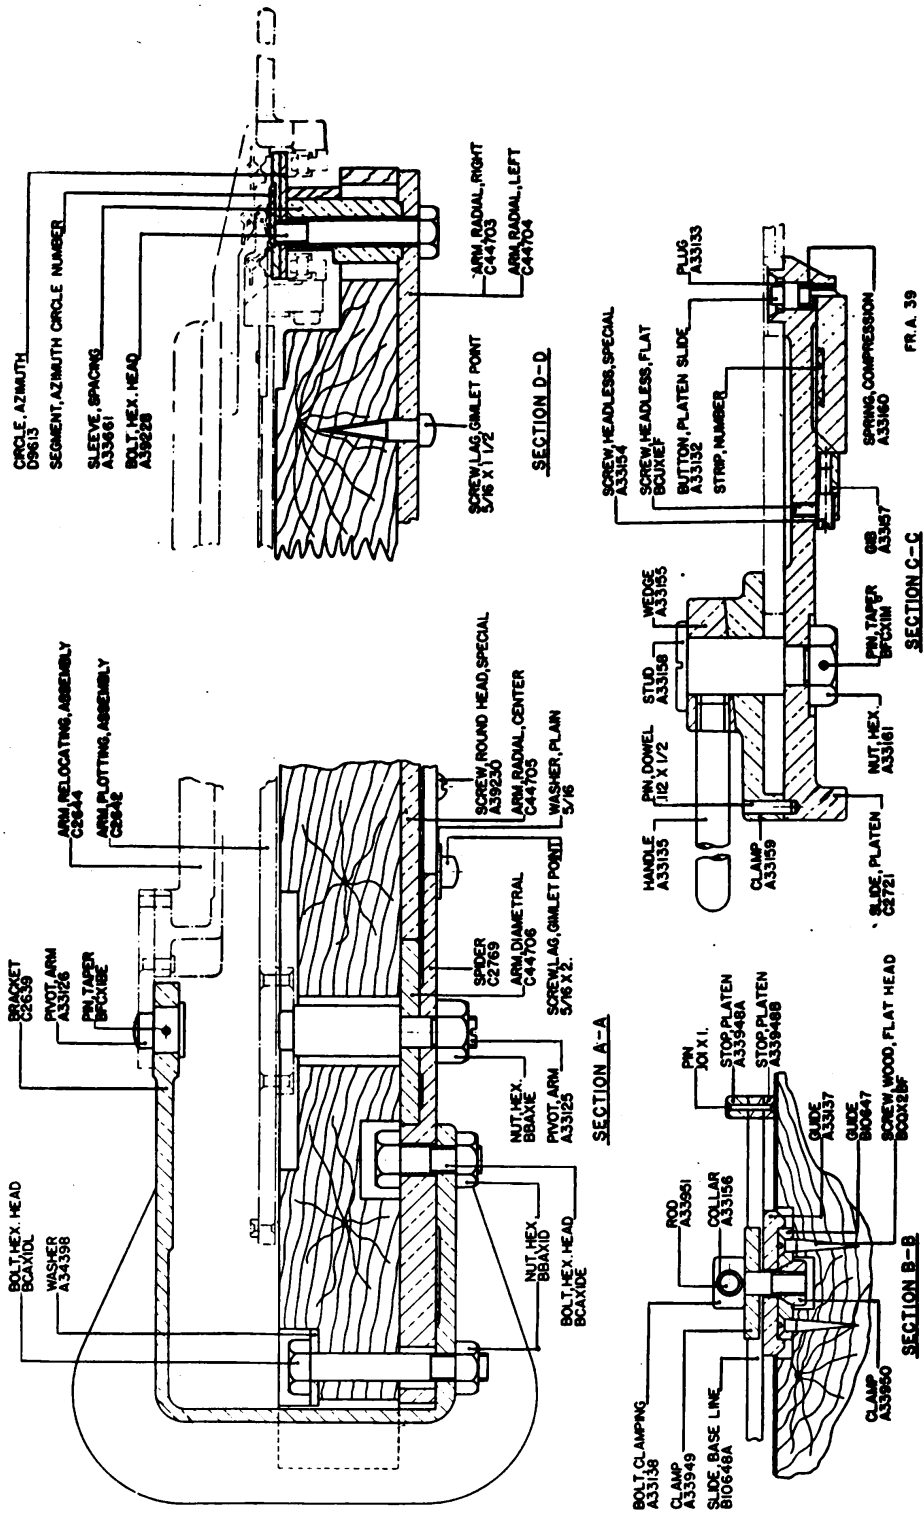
Cloke plotting and relocating board M1928—sectioned views.
